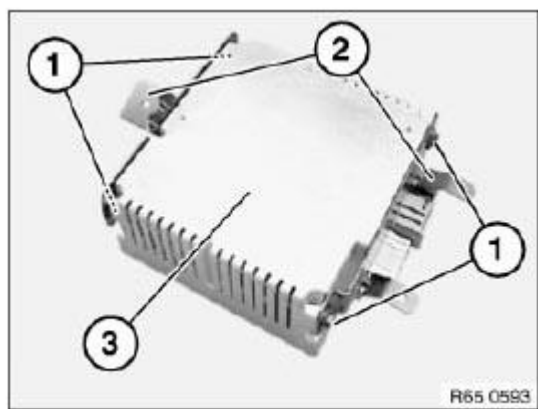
Identifying Screws, Holder And On-Board Monitor
